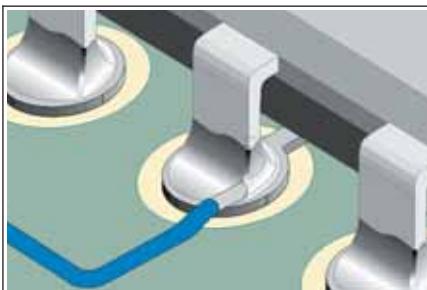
Acceptable Wire soldered parallel to lead on component side.
